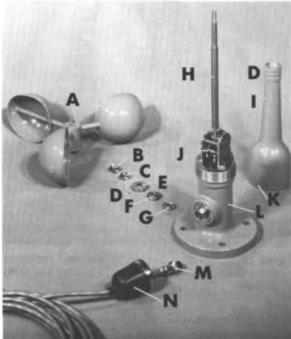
Weather Measure W164 contact anemometer: A, Cups; B, cap lock nut; C, cap nut; D, top lock screw; E, bearing oil seal; F, top bearing; G, bearing oil seal; H, drive shaft with worms; I, top housing; J, drive gear; K, top housing lock pin; L, bottom housing; M, cannon plug; N, weather boat.
